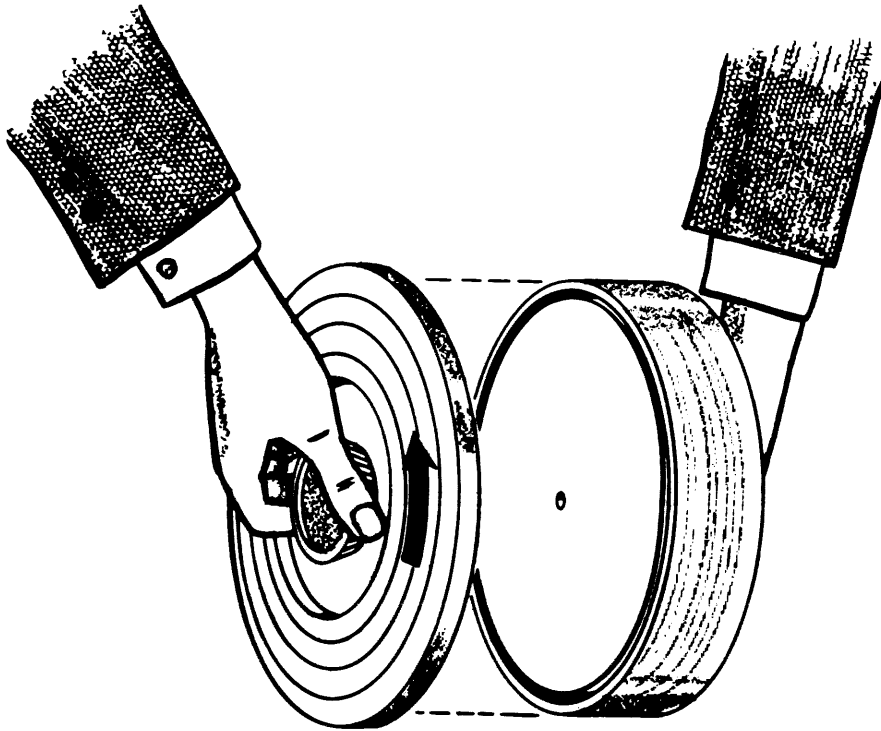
Removing Bottom Plate (Courtesy of IBM)
